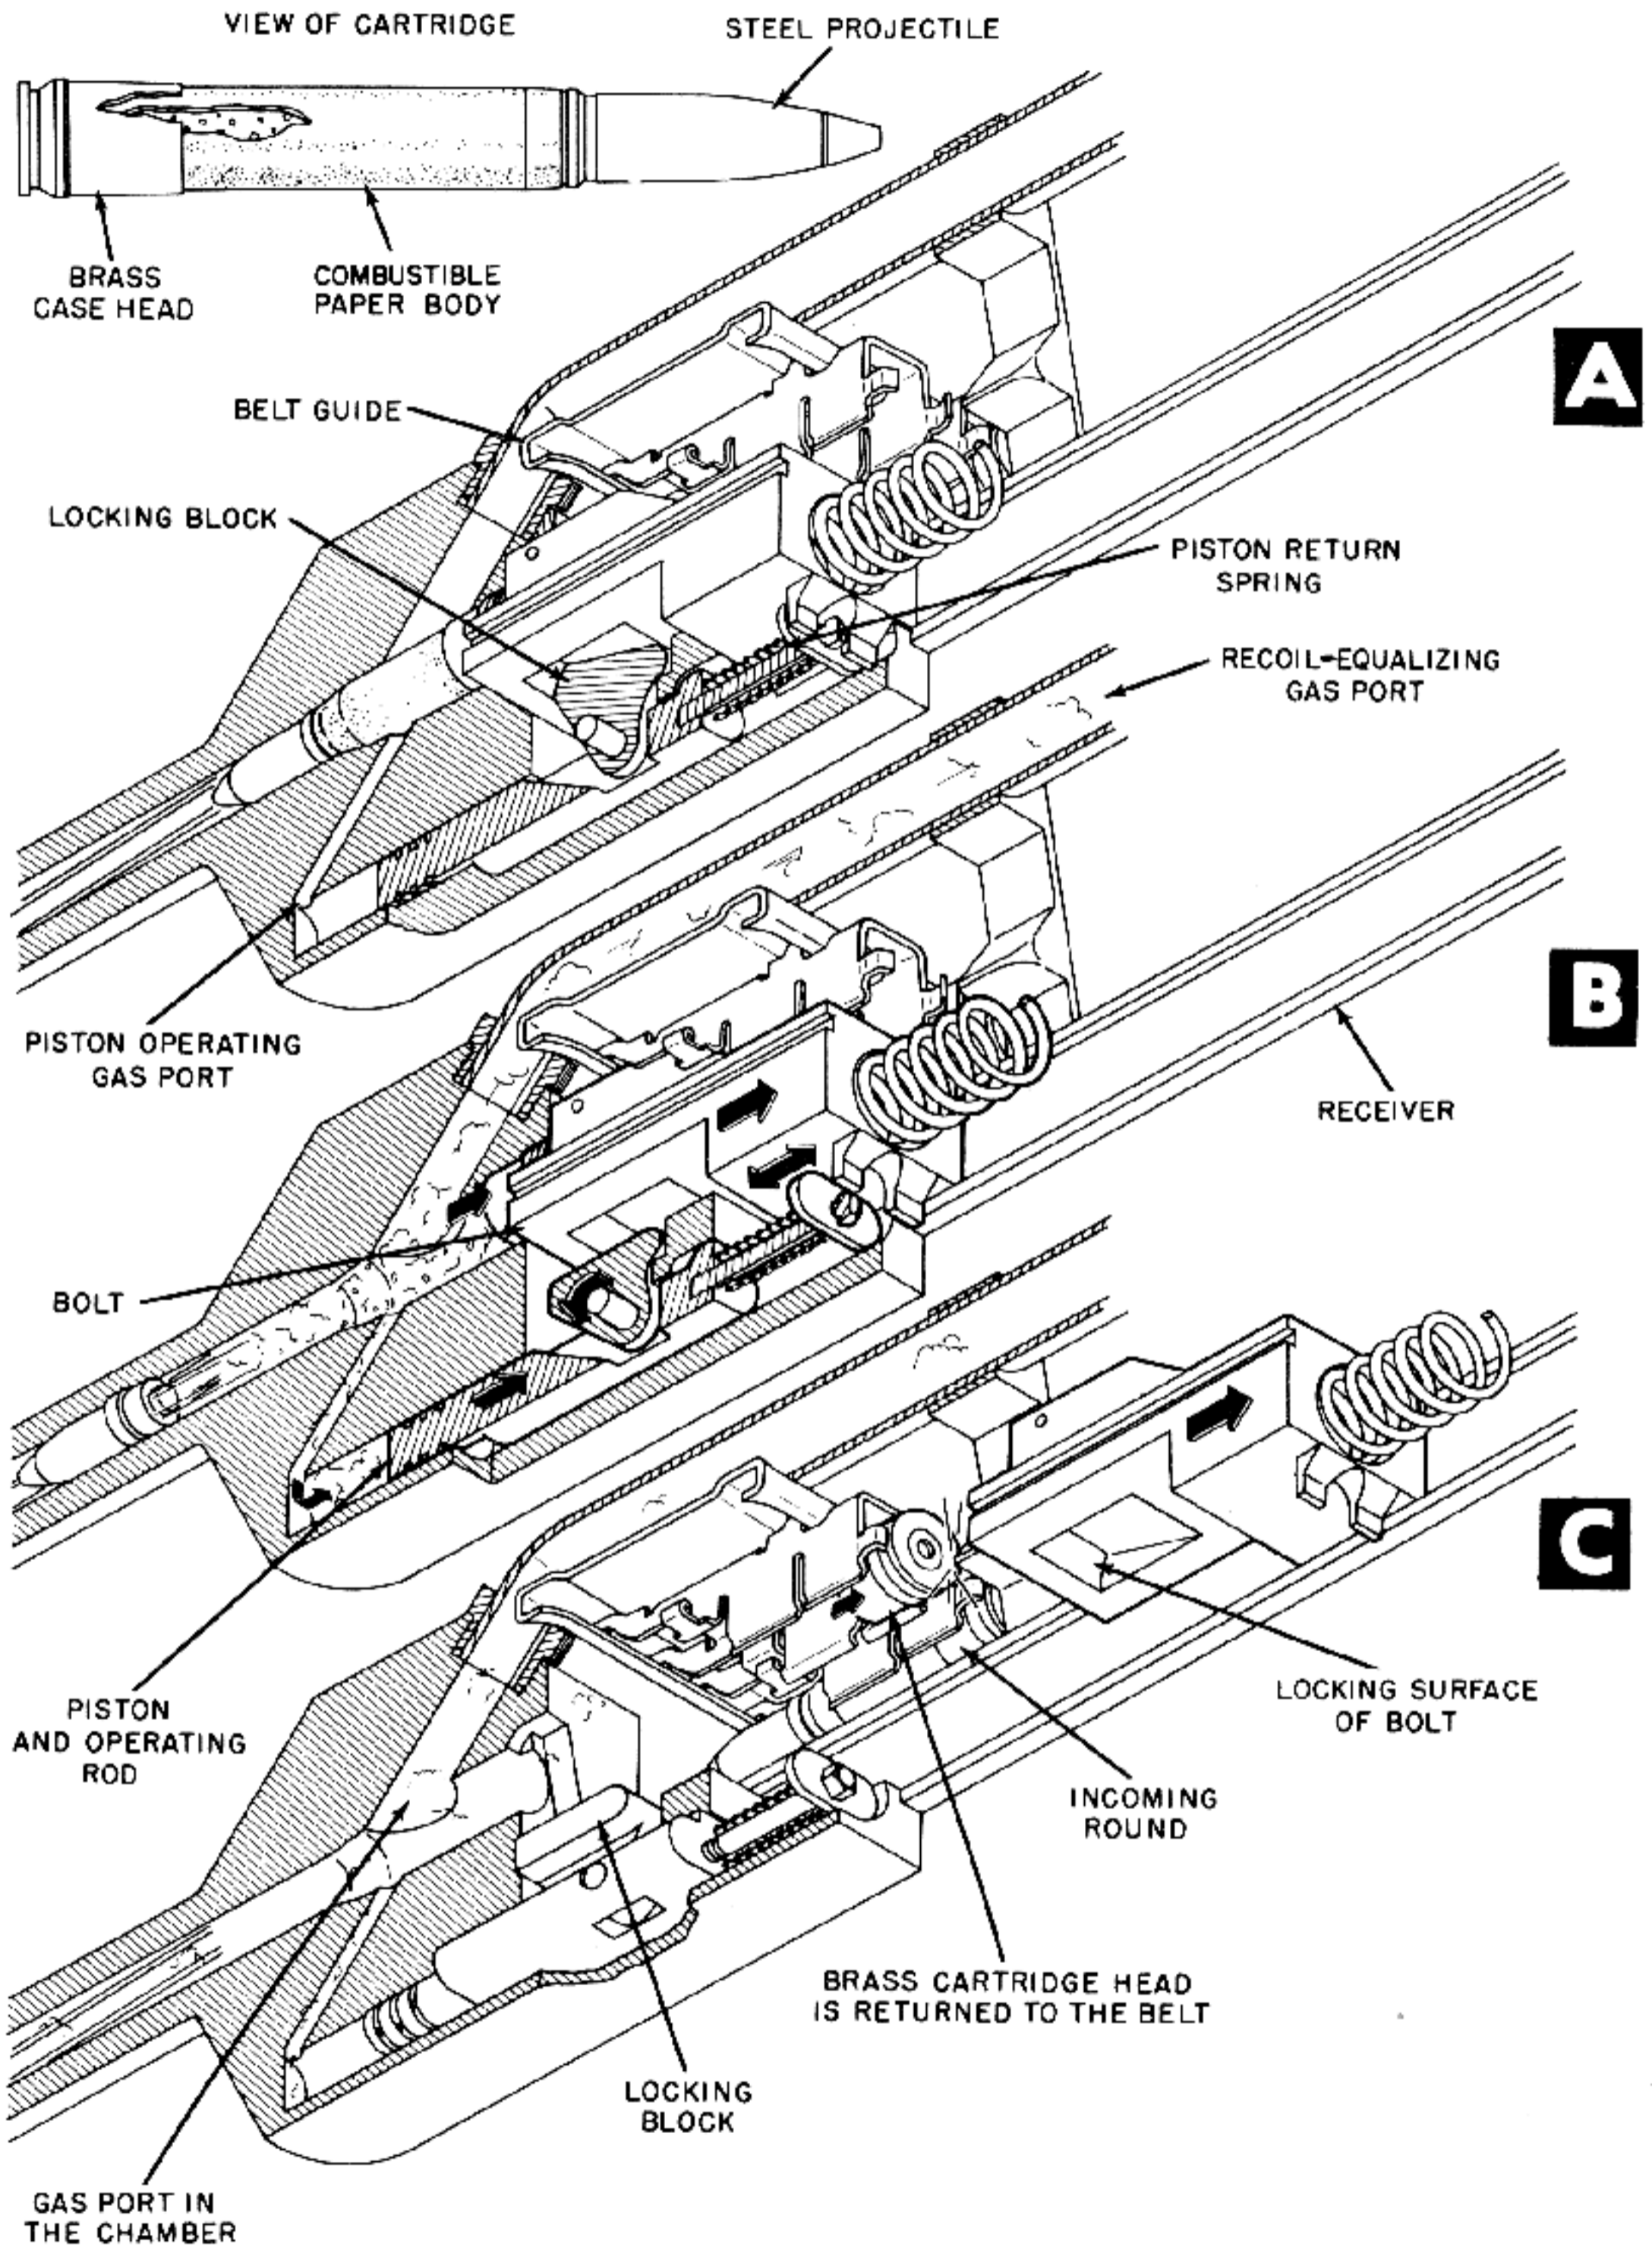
Gas Piston Cams Locking Block Free of the Bolt.
